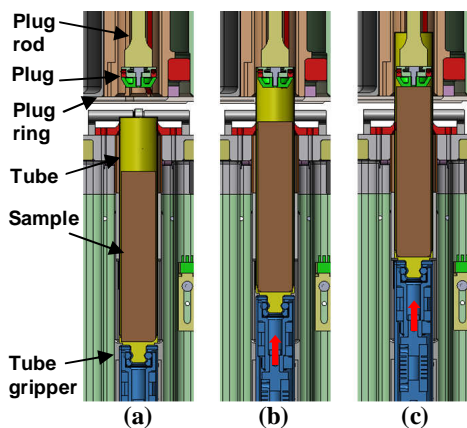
Sample tube plugging operation: (a) Filled sample tube positioned under plug, (b) tube extended onto plug, (c) tube further extended to fully seat core sample and plug in tube.
